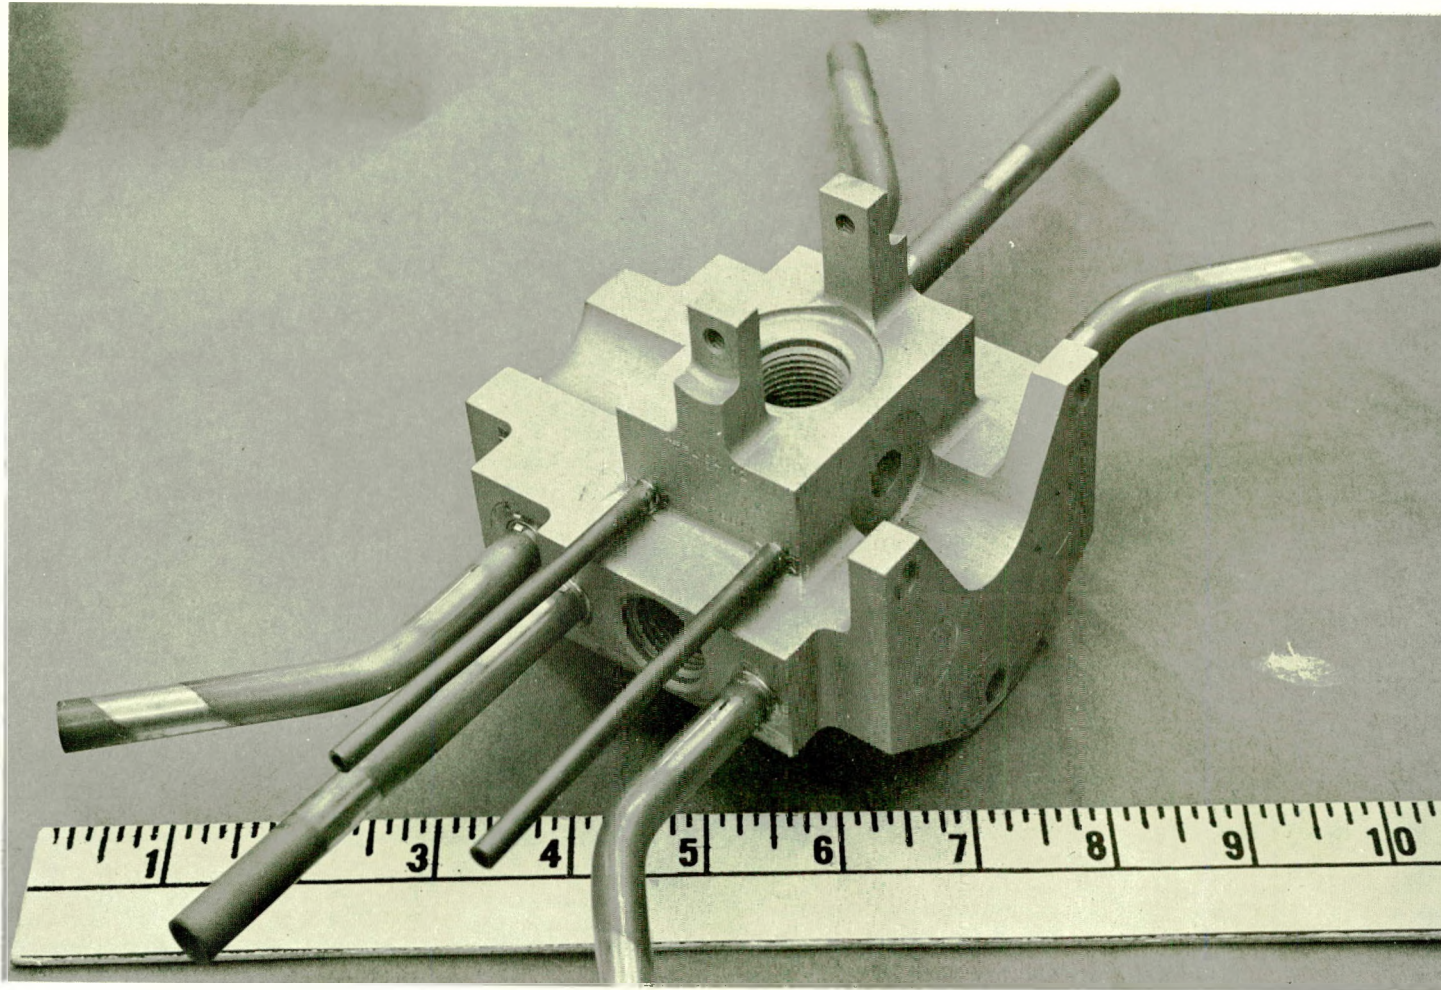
HYDRAULIC VALVE FABRICATED BY BRAZING AM-355 PRECIPITATION-HARDENING STAINLESS STEEL BODY TO TUBING SEGMENTS OF AM-350 STEEL (Ref. 78)
